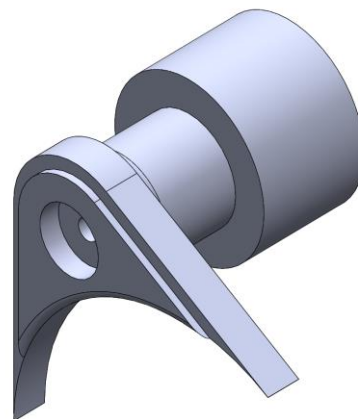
Inside view of the pin mill motor housing. The circular cutout is for a bearing. An exit hole for the pin mill axle can be seen inside the cutout.
